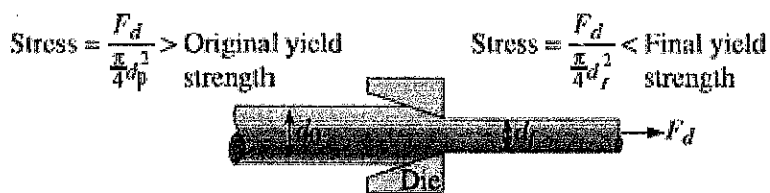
; The wire-drawing process. The force F_d acts on both the original and final diameters. Thus, the stress produced in the final wire is greater than that in the original. If the wire did not strain harden during drawing, the final wire would break before the original wire was drawn through the die.
